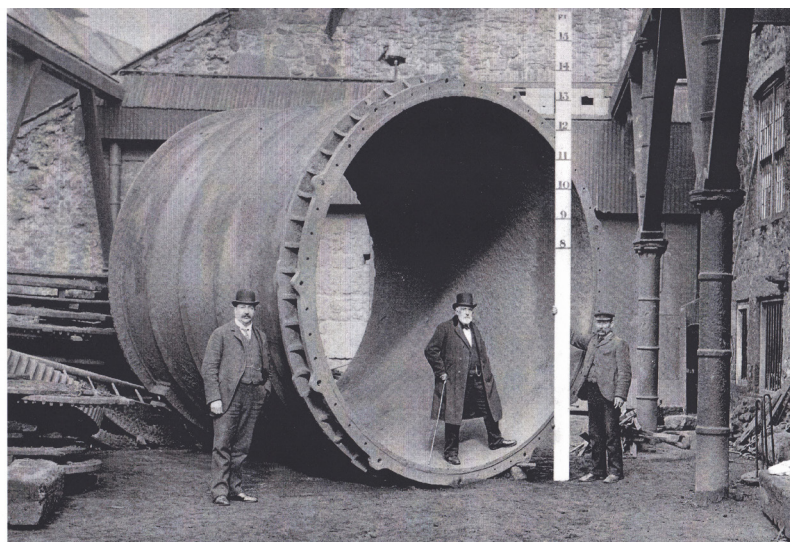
Believed to be the largest cylinder ever cast, this cylinder cast by Harveys was destined for the Cruquius engine in Holland used to drain the Haarlemmermeer.
